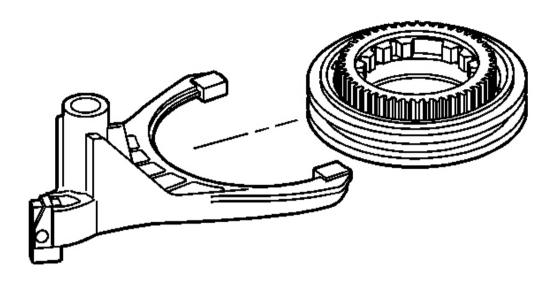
Lockup Mode Shift Fork & Lockup Shift Assembly Courtesy of GENERAL MOTORS CORP.
